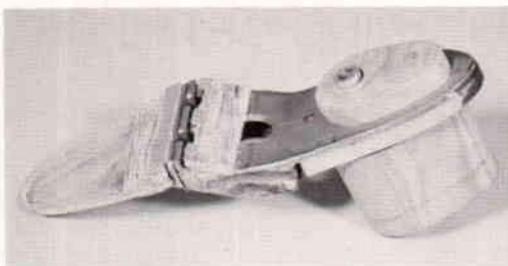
Keel assembly with wooden parts installed preparatory to casting of the foam rubber.
